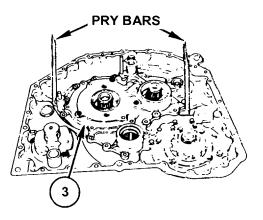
Center Housing Assembly. REMOVE LEFT BRAKE ASSEMBLY – Cont.
